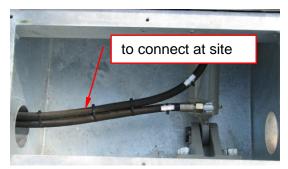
hydraulic hose inside cylinder housing, outgoing to second housing (only for Wedge>3.0m)
